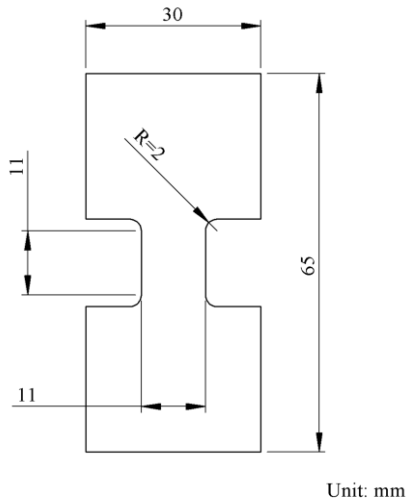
Geometry and dimensions of the modified dog-bone specimens.
